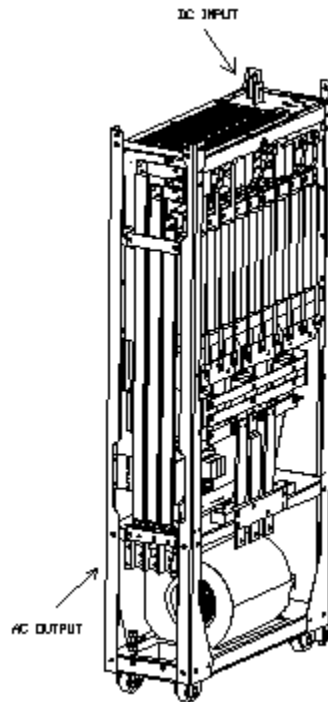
Inverter 3D drawings - Front AC OUTPUT
